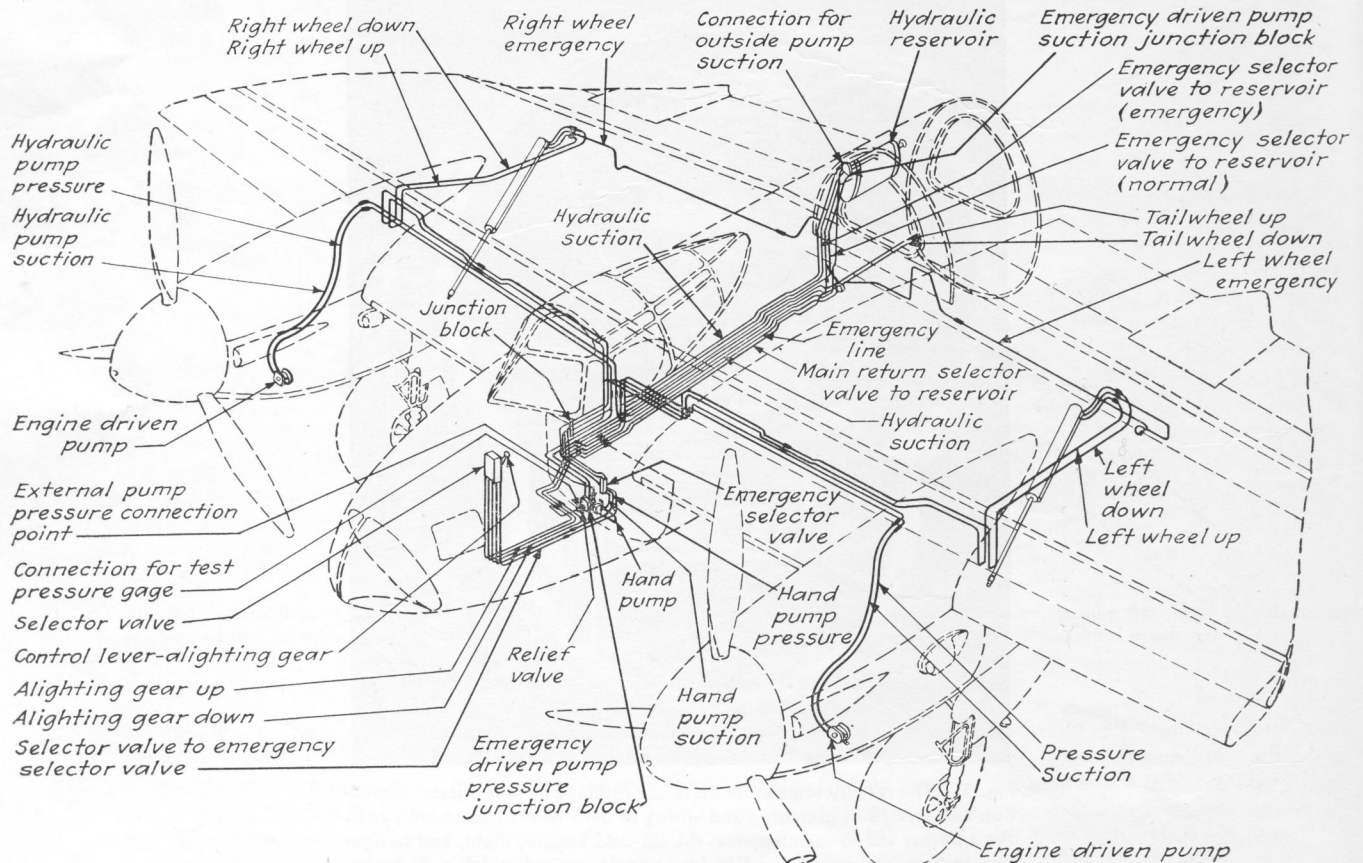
The landing gear hydraulic system draws fluid from a general reservoir which is supplied by engine-driven pumps.
